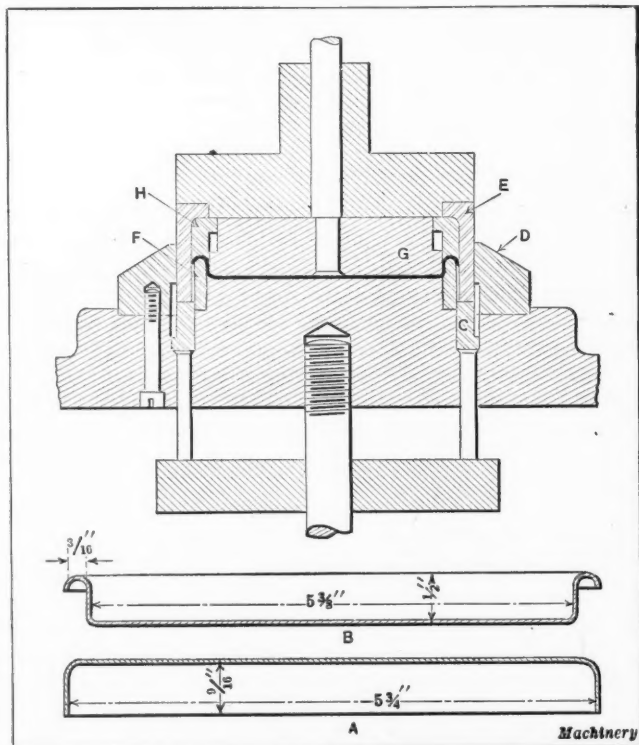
Another Combination Die which produces a Canister Cover by the Inverted Method of drawing
